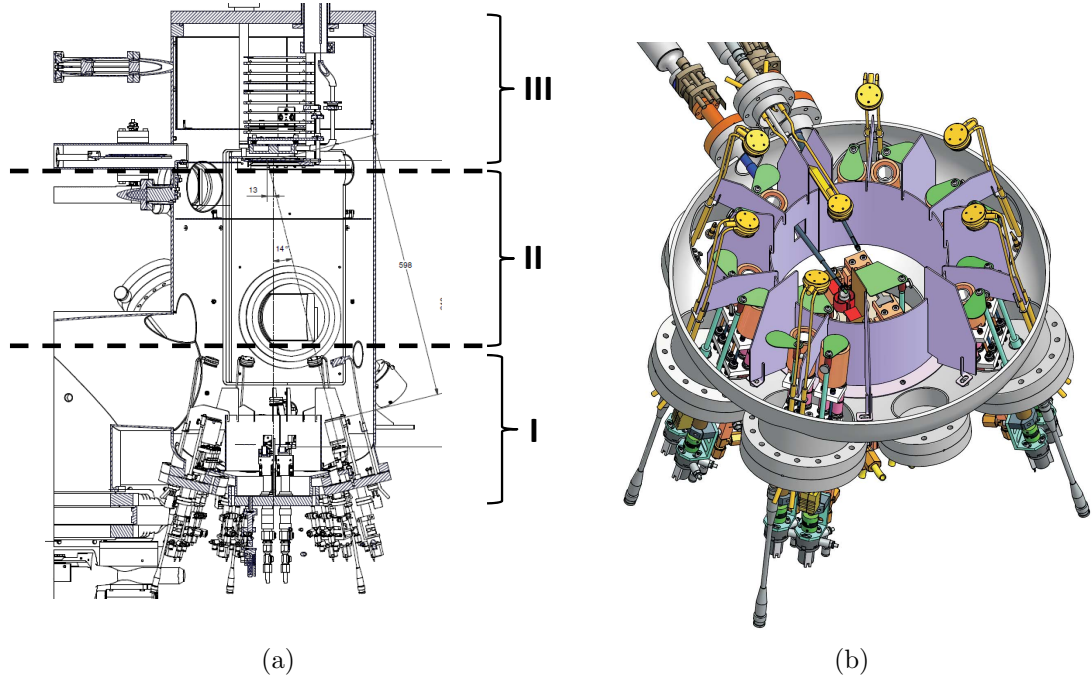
(a) Detailed presentation of the vacuum chamber cross section with its labeled parts and (b) the chamber bottom of the Bestec tool.
